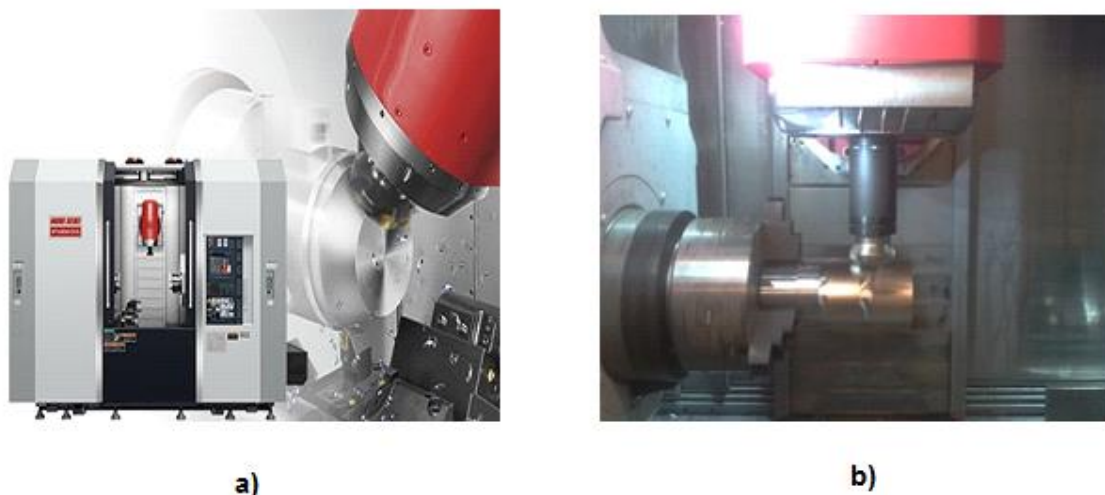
a) Mori Seiki mill-turn machine tool b) Tool wear experiment setup
